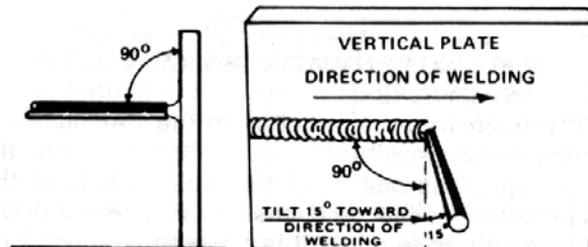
Horizontal Weld Beads - Vertical Plate
